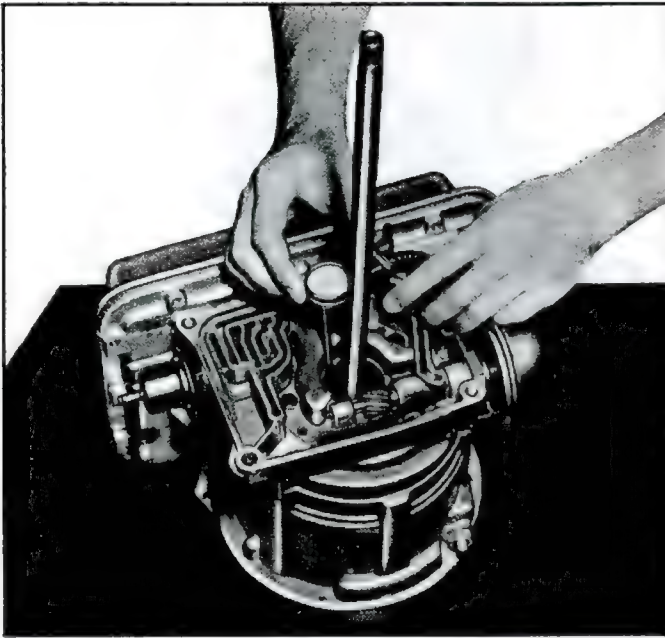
Zeroing Dial Indicator on J-8364 on Output Shaft
